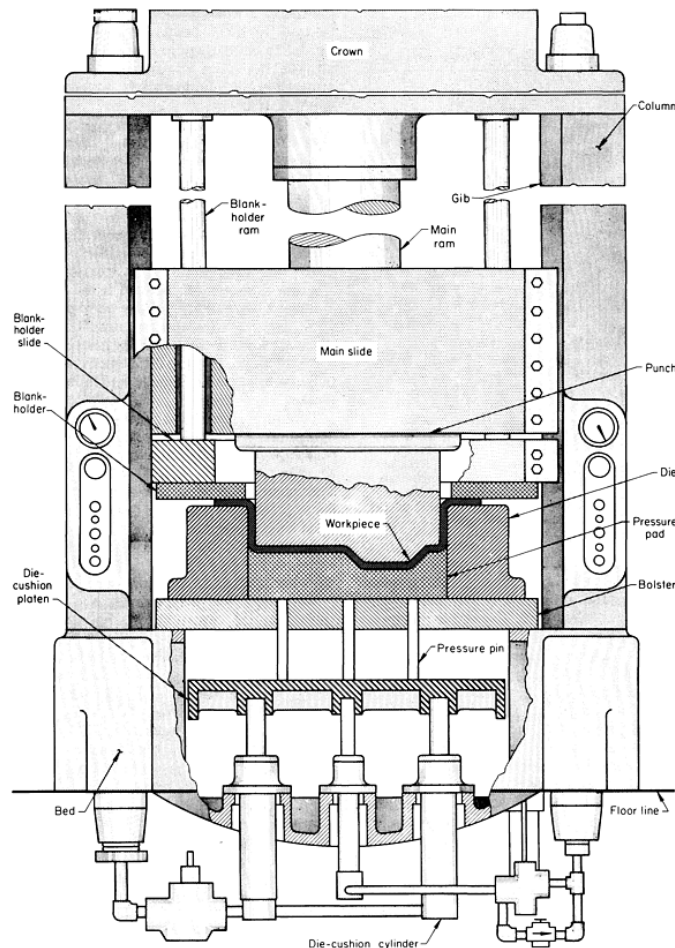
Principal components of a double-action hydraulic press with a die cushion.
